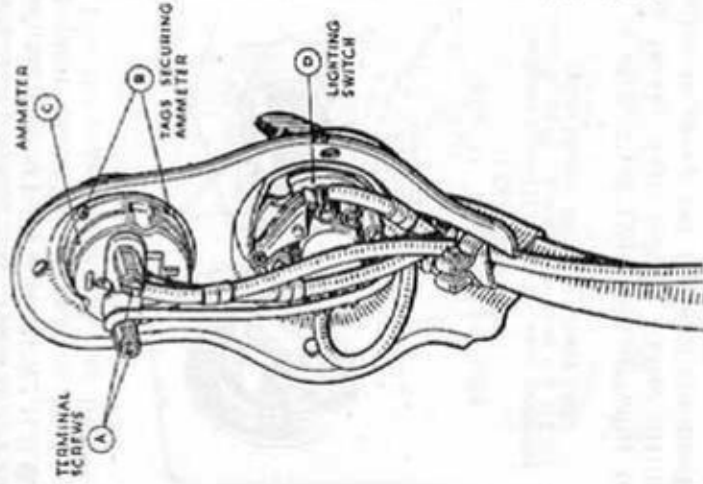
AMMETER AND SWITCH PANEL REMOVED FROM LUCAS DU42 HEADLAMP
